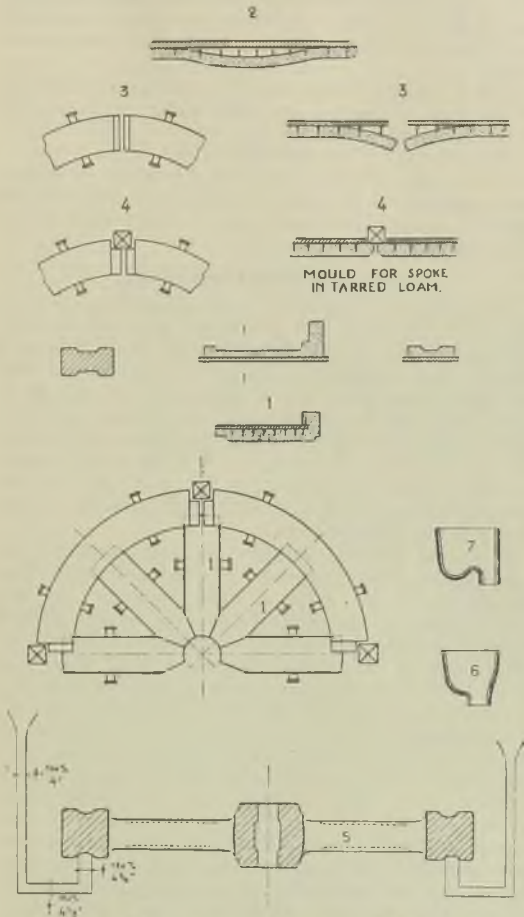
DETAILS FOR FLYWHEEL MOULDING.
